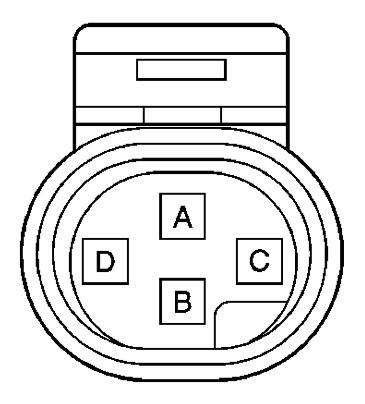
Engine Oil Pressure (EOP) Switch Connector End View Courtesy of GENERAL MOTORS CORP.
